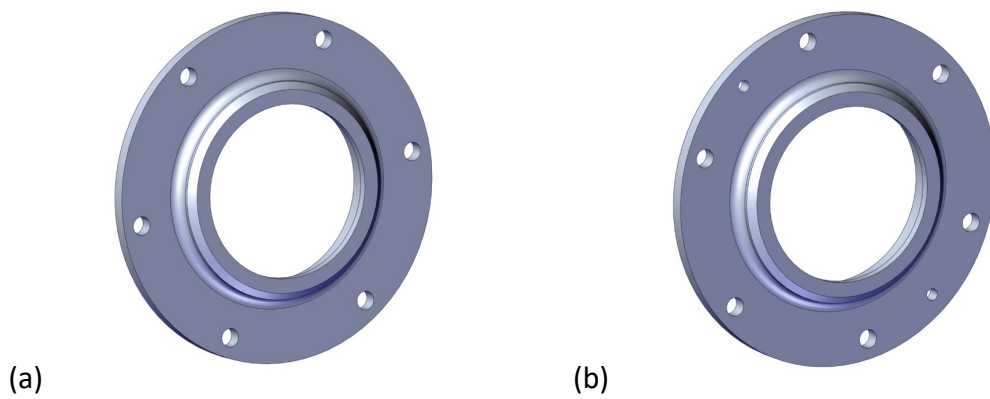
a) Drive side bearing housing. b) Non-drive side bearing housing.
